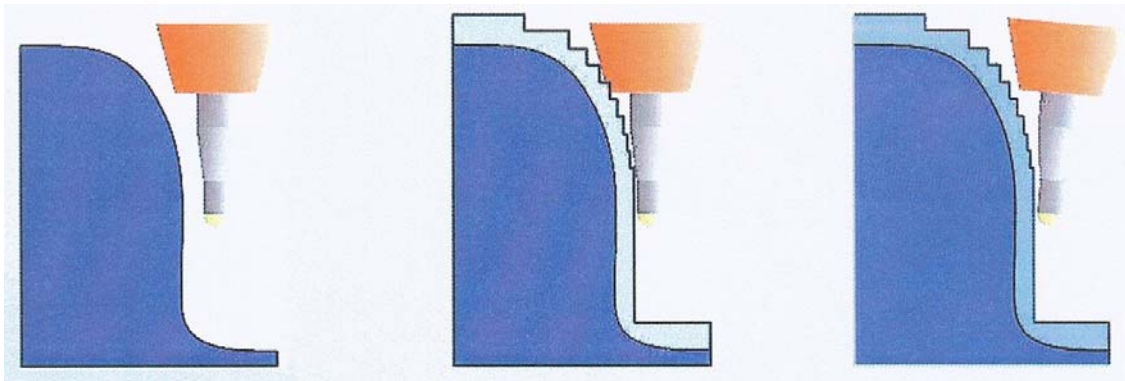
Conversion from 3-axis machining to 5-axis machining in system NCspeed
